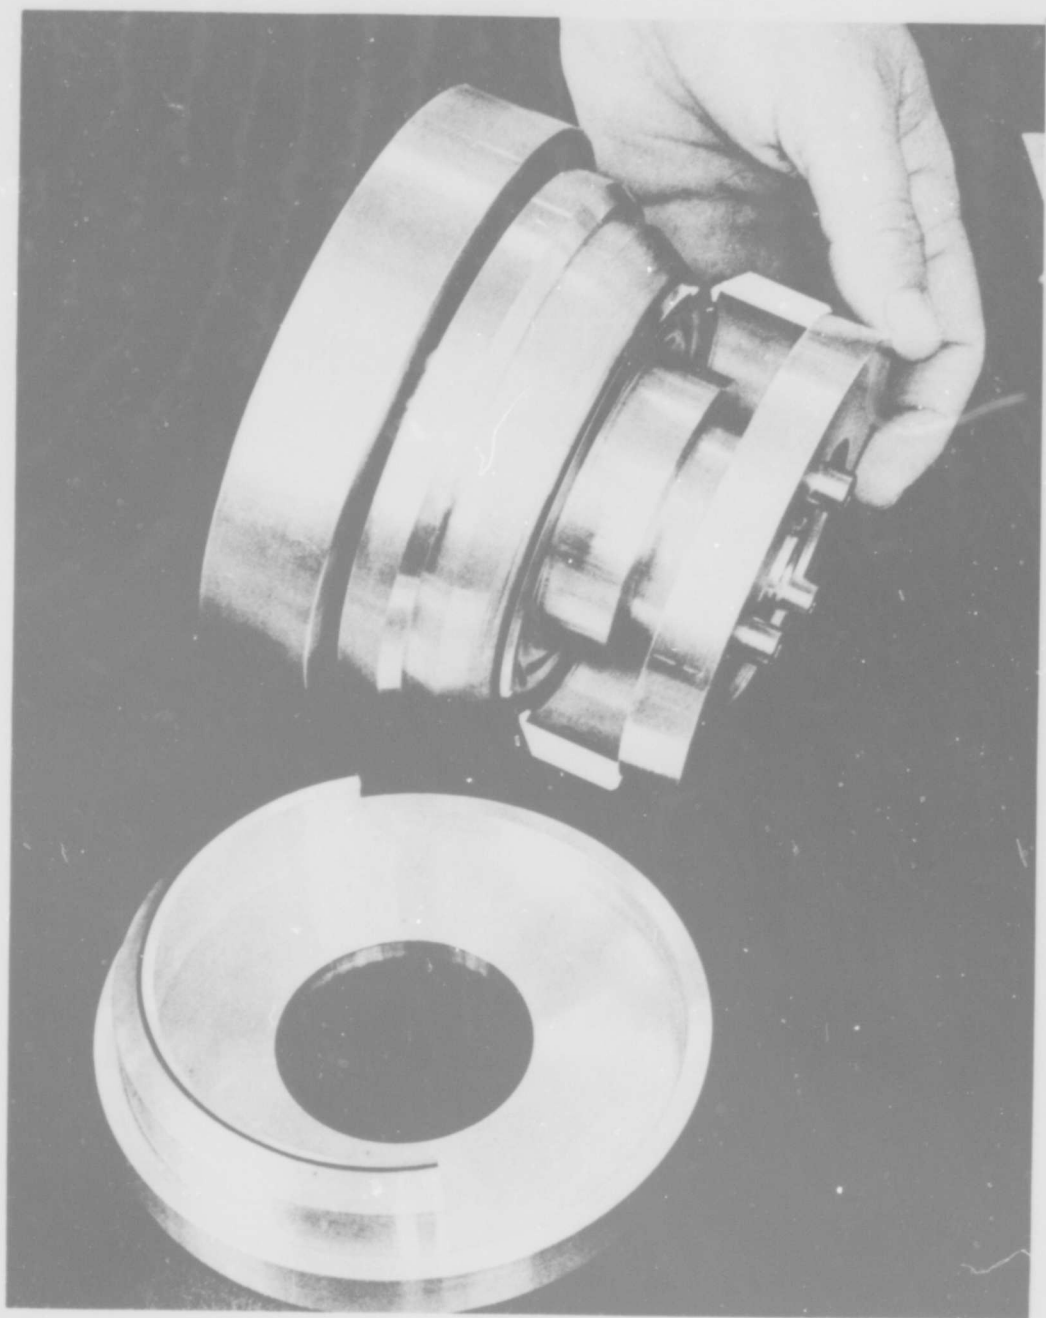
PARTIAL DISASSEMBLY OF THE OUTER-CONVOLUTION-WELD TOOLING
